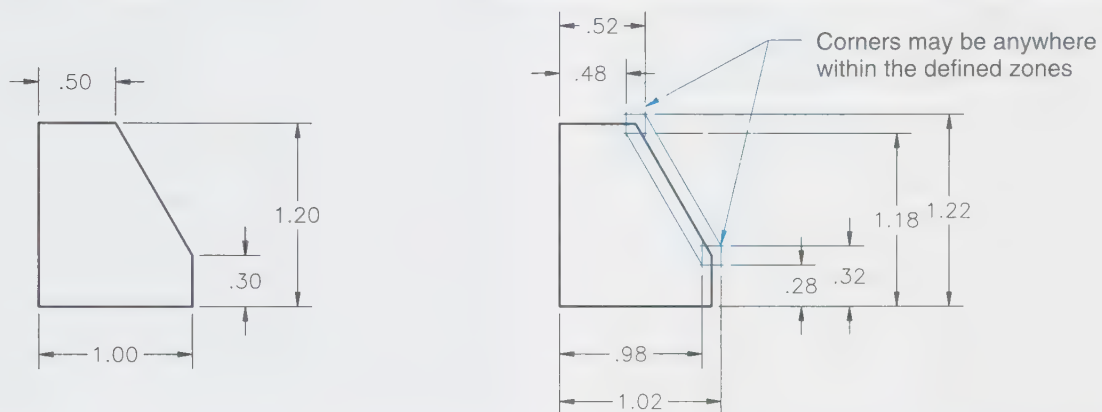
The method used to dimension an angle affects the tolerance on the angle. To more completely define the requirements, form, orientation, or profile tolerances may be used.
